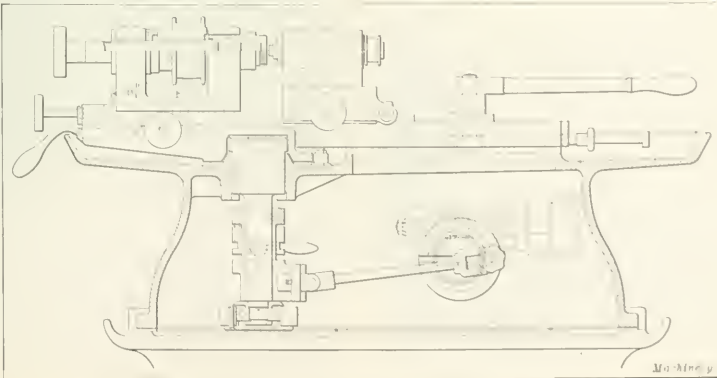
Partial Front Elevation of Machine shown in Fig. 1
